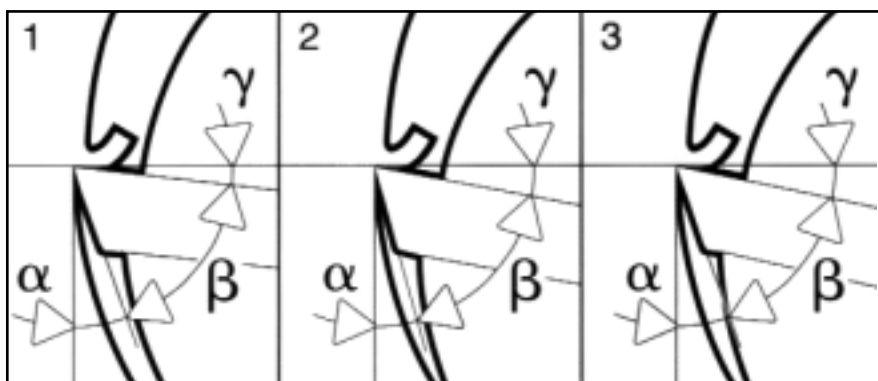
1) A positive rake angle with positive flank clearance; 2) an extra-positive rake angle with insufficient flank clearance; and 3) an extra-positive rake angle with positive flank clearance. γ = positive rake angle, β = edge angle, α = clearance angle.
